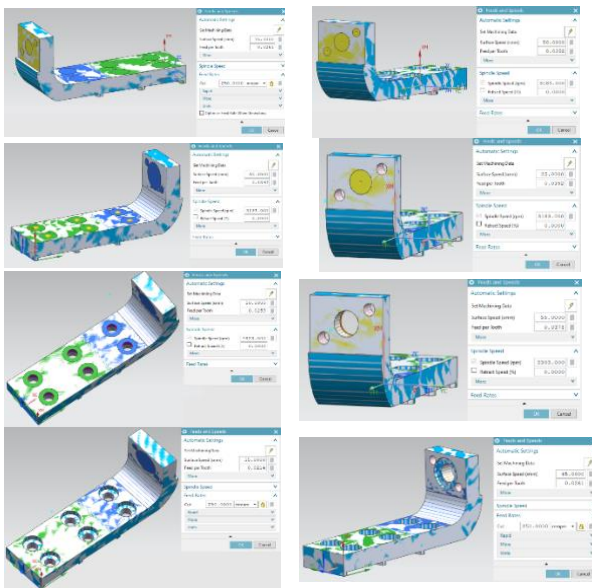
Cutting in the area where the jaws and the strip steel are fixed
